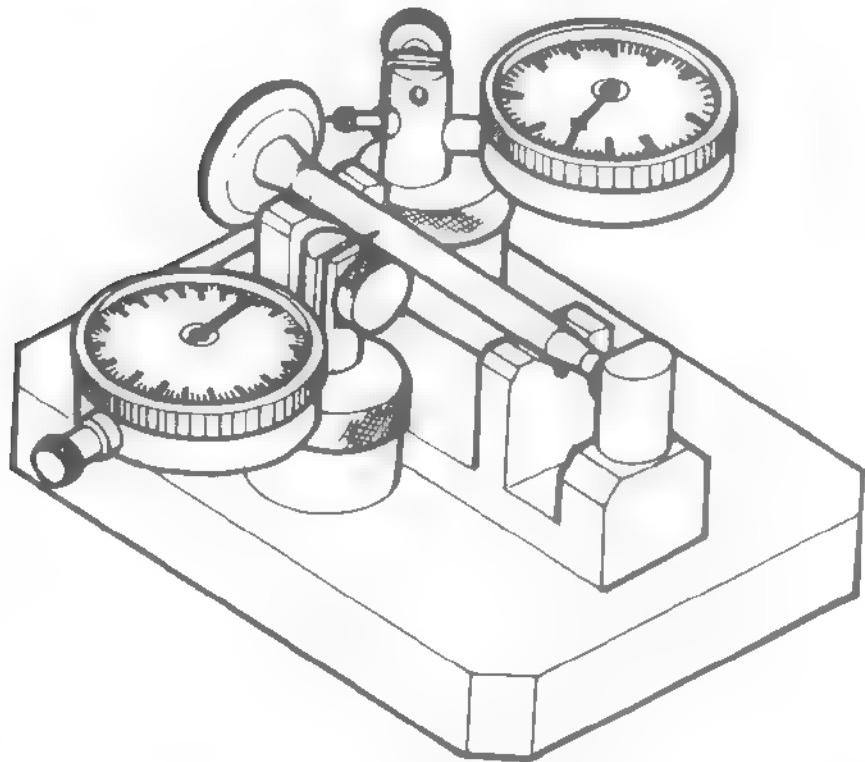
CHECKING VALVES BY MEANS OF D-11 DEVICE.
